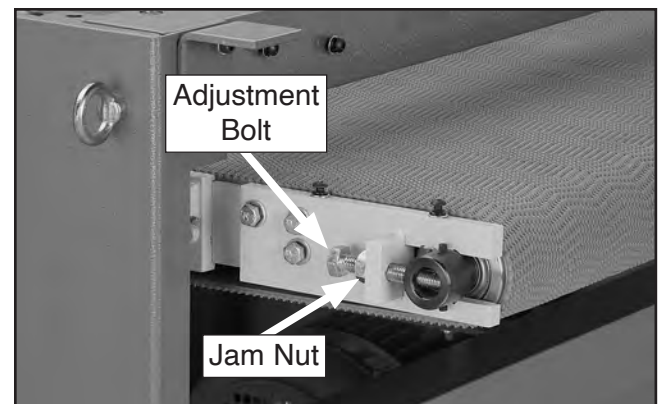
Conveyor tensioning & tracking controls (guard removed for clarity).
